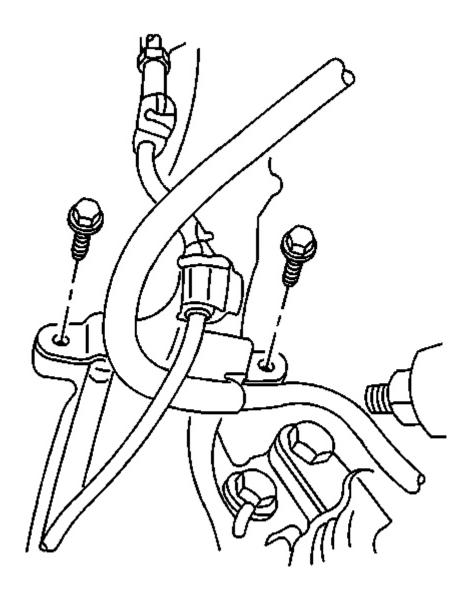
Removing/Installing Brake Hose Bracket Retaining Bolts Courtesy of GENERAL MOTORS CORP.
